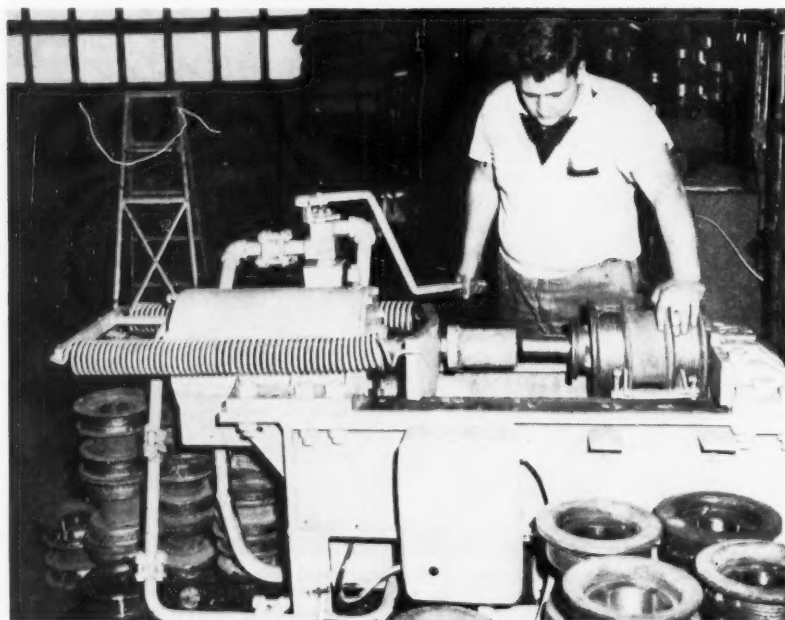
A specially-built hydraulic press assembles shafts on the rebuilt roller. After completion, the rollers are put in stock to be sold on Beckwith's exchange plan.
